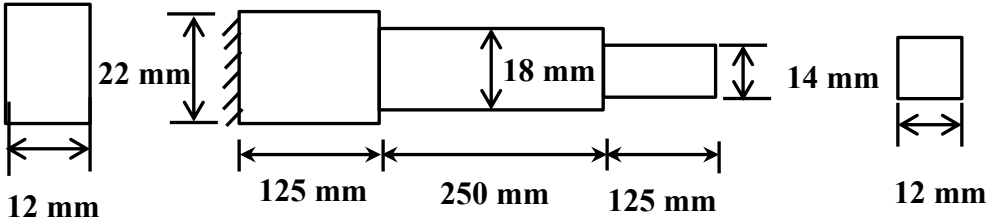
Sketch of two step cantilever beam of rectangular cross-section
